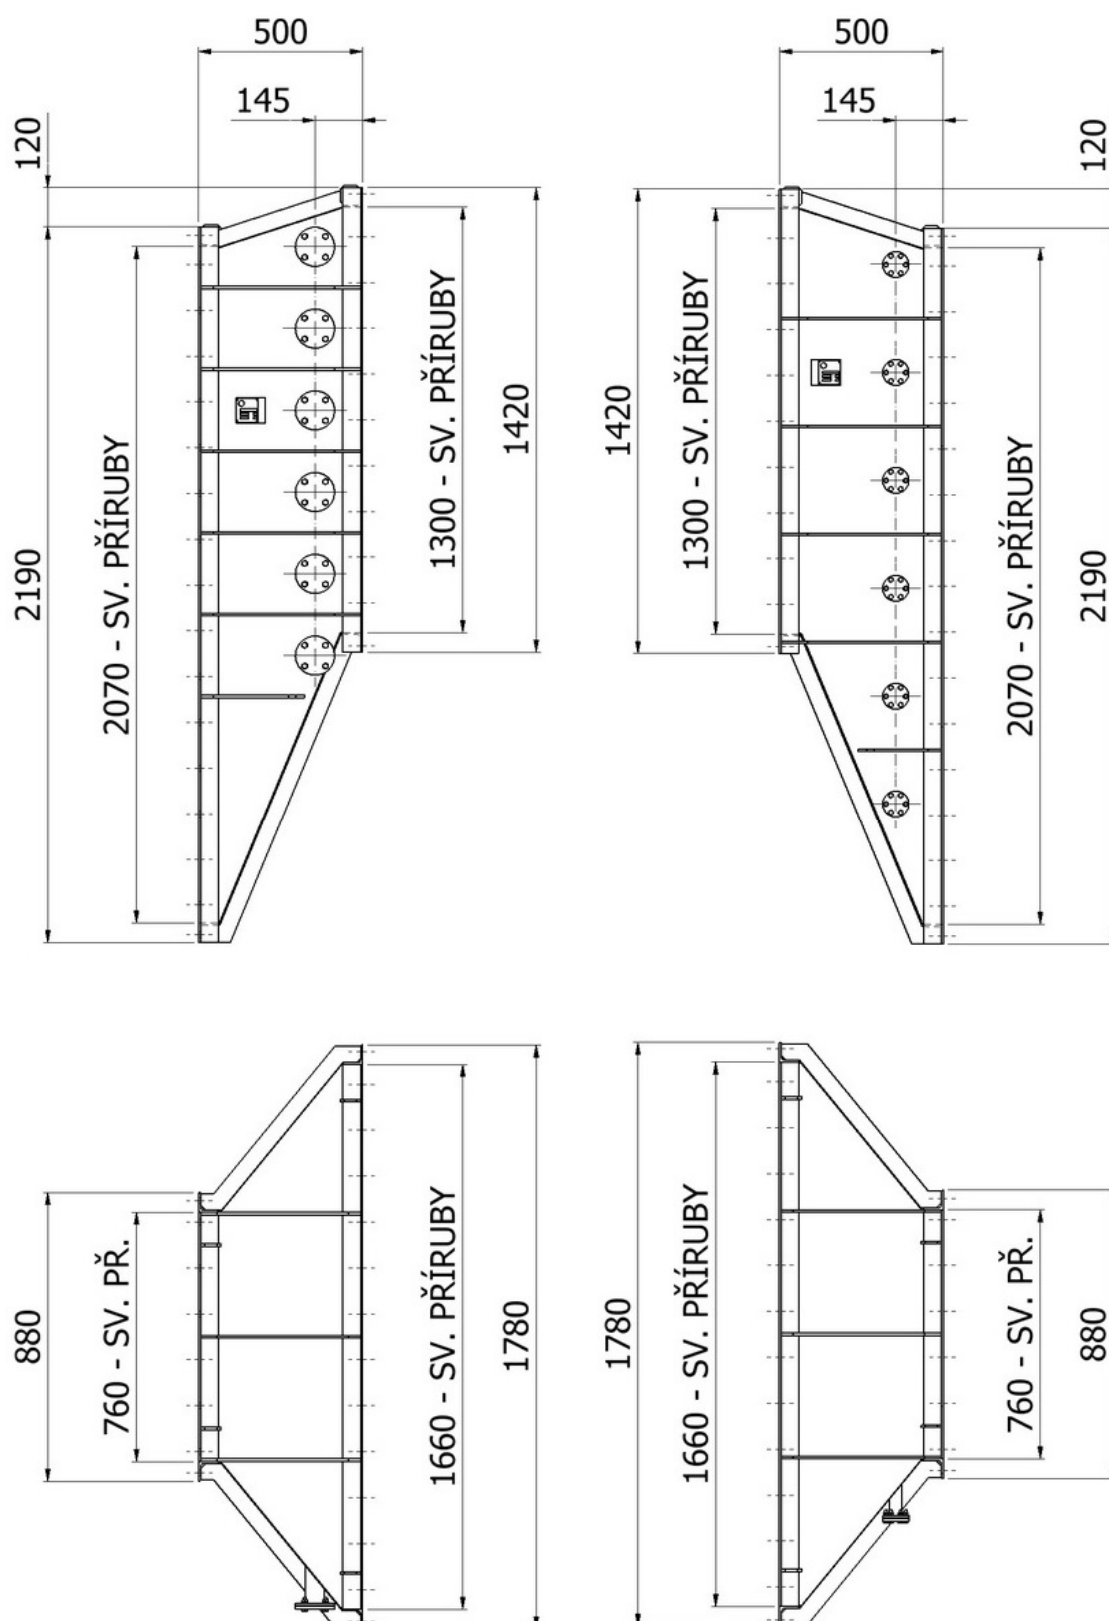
Main dimensions of the VSS 12 connecting parts, solid right-hand model
